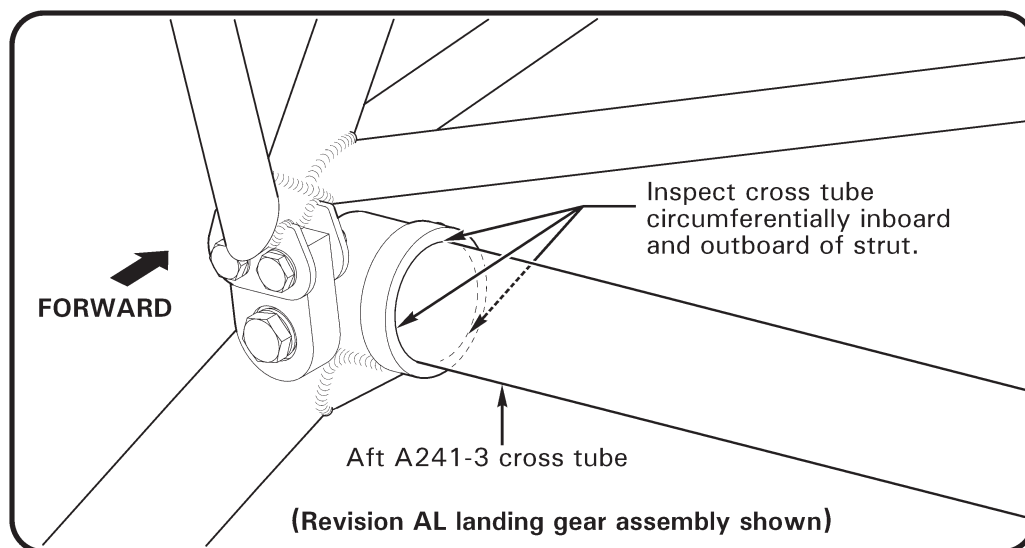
CROSS TUBE-TO-STRUT INSPECTION
